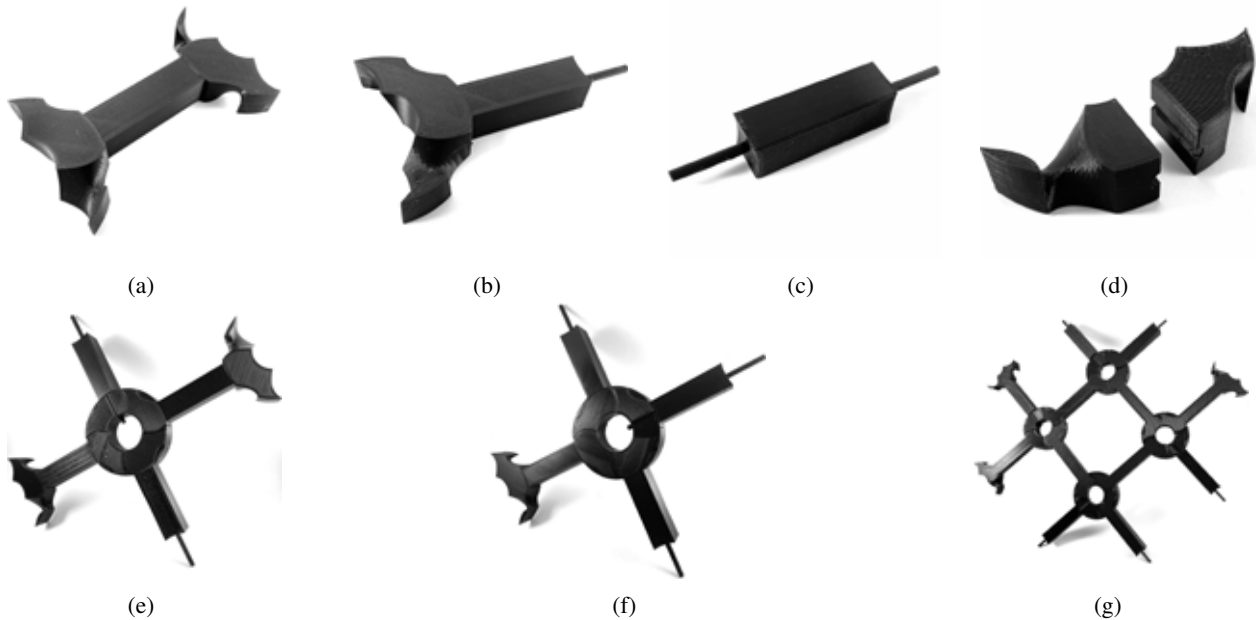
3D printed interlocking Edge Elements and key pieces to construct 2D quadrilateral frames: (a) A basic Edge Element for quadrilateral grid, (b) One sided locking Edge Element, (c) Two sided locking Edge Element, (d) Split Connector tiles, (e) An assembly of a four sided corner that use all the pieces, (f) Another assembly of a four sided corner that use all the pieces, (g) A complete assembly of a single quadrilateral
